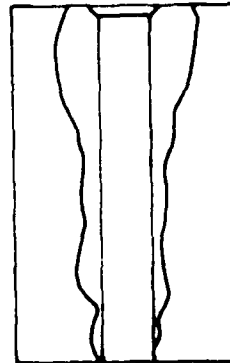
(c) FRACTURE SURFACES TYPE (a) SPECIMENS
